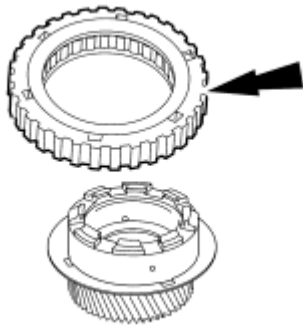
Forward One-Way Clutch Outer Race & Sprag Assembly
